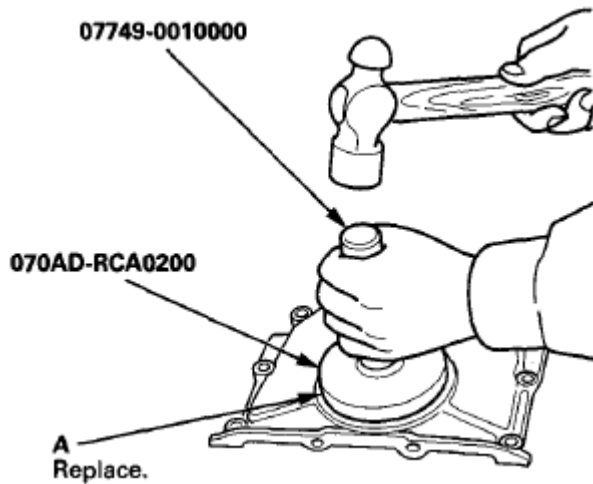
Installing Crankshaft Oil Seal Using Driver Handle And Attachment
